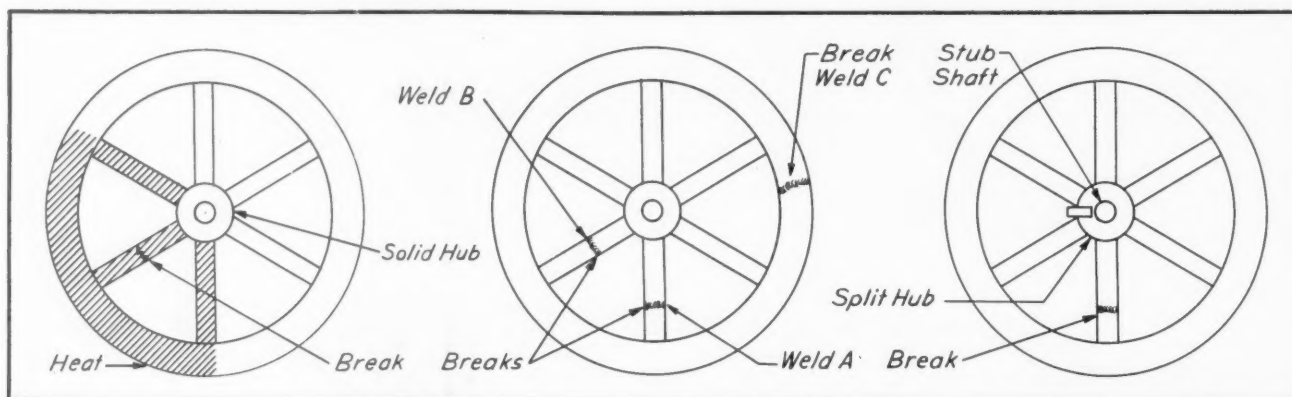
WITH ONE SPOKE fractured near the hub, heat the adjacent spokes and rim section. Keep even heat in the broken spoke and complete the weld.
